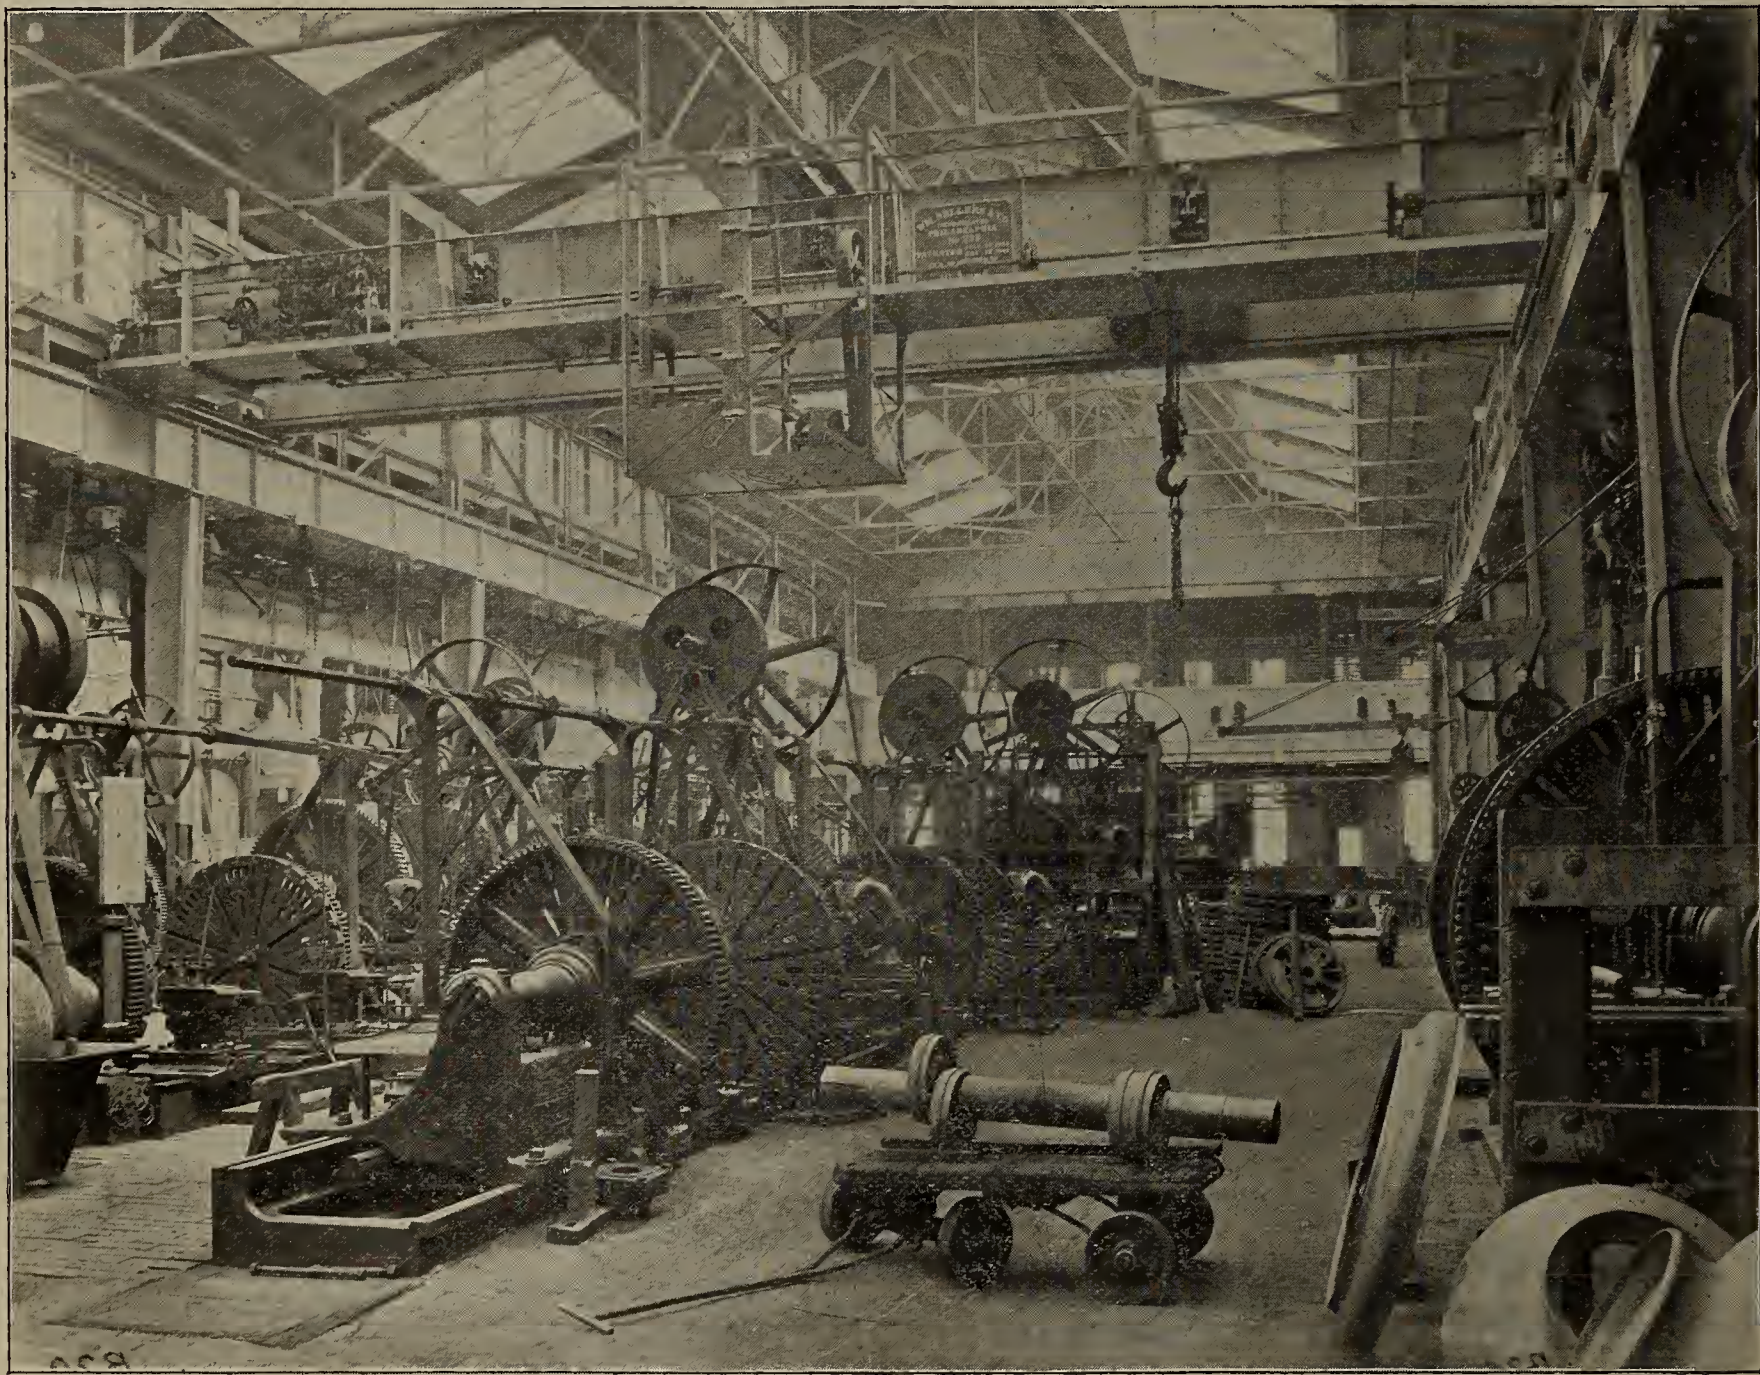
GENERAL VIEW WHEEL LATHE ROOM, BALDWIN LOCOMOTIVE WORKS.
